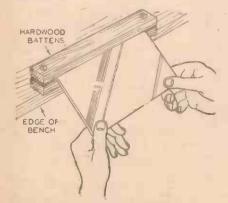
An improvised "vice" for holding aluminium sheet while bending it to form a chassis.
